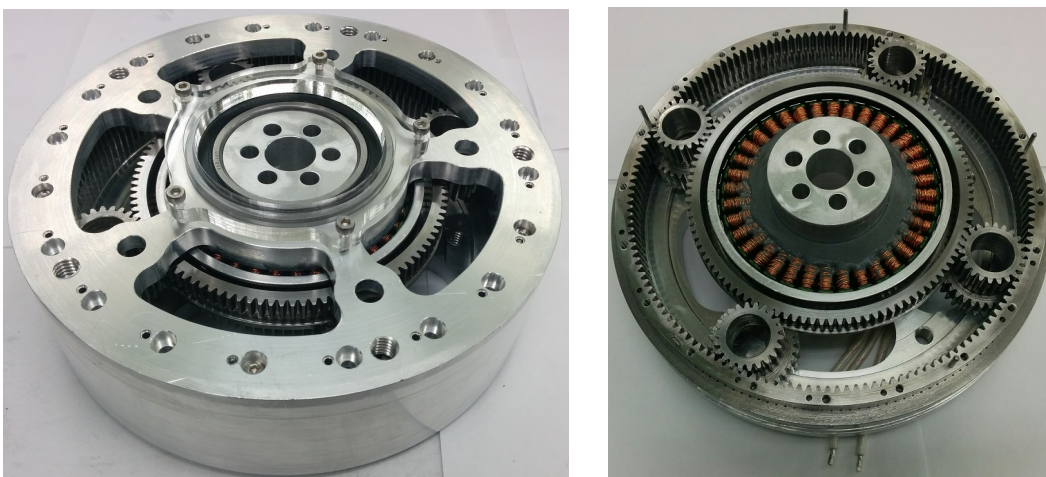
Low reduction actuator prototype. On left: complete assembly. On right: with output case removed.
